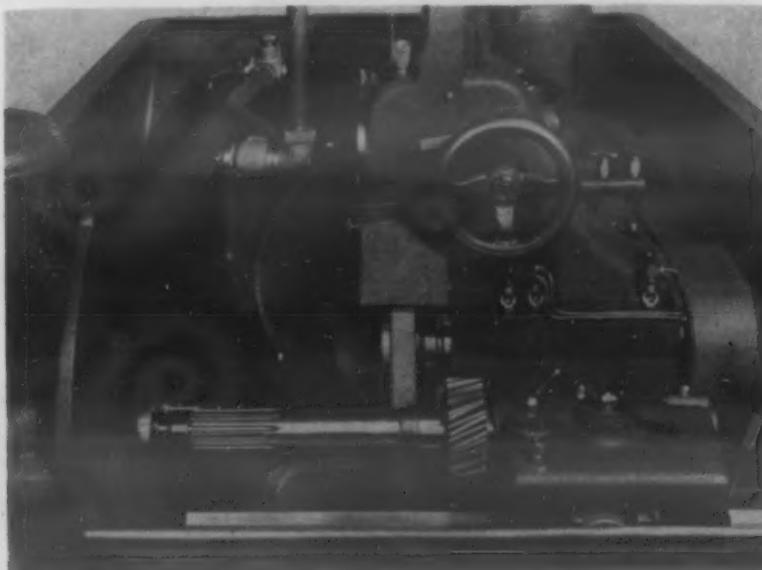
An automotive transmission part in place in a precision thread grinder after having its $1\frac{1}{8}$ -16 thread ground. Note the formed (crush-formed) wheel. (Courtesy: The Sheffield Corp.)
